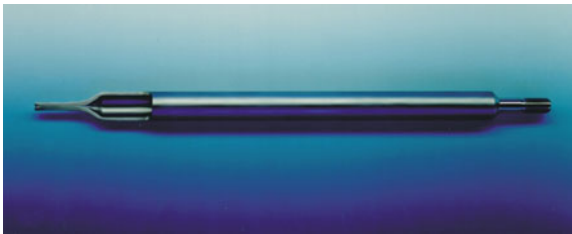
Hollow shock absorber piston rod, sealed pressure-tight by swaging
